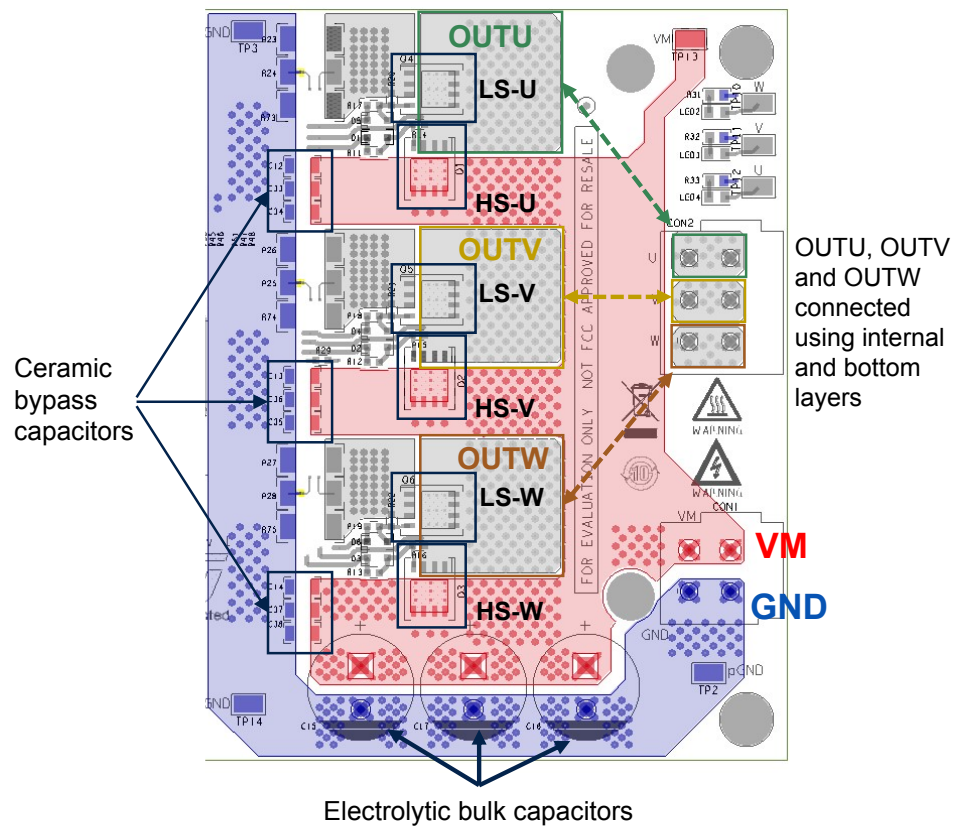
EVALSTDRIVE101 1st inner layer PCB
